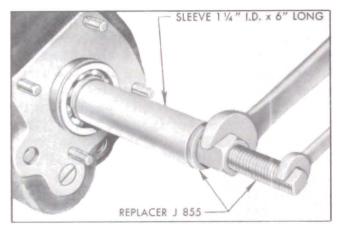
Installing Rear Bearing with Replacer J855 and Sleeve
